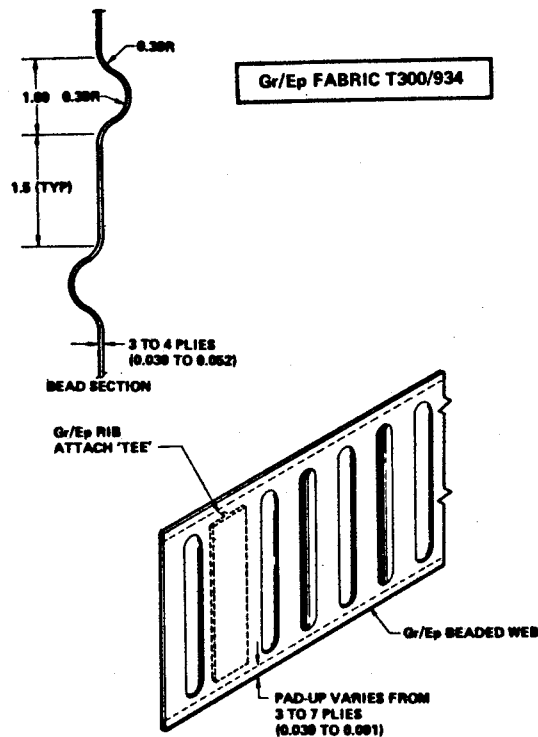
YC-14 Elevator Gr/Ep Spar Web Study – Beaded Stiffeners
